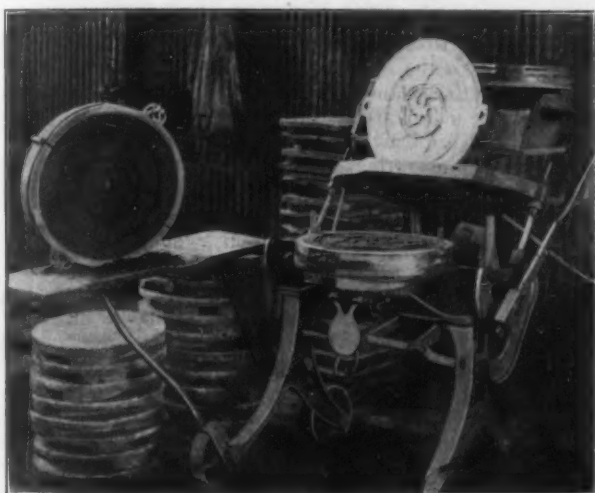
The Farwell Squeezer Molding Machine Made by the Adams Company, Dubuque, Iowa.
